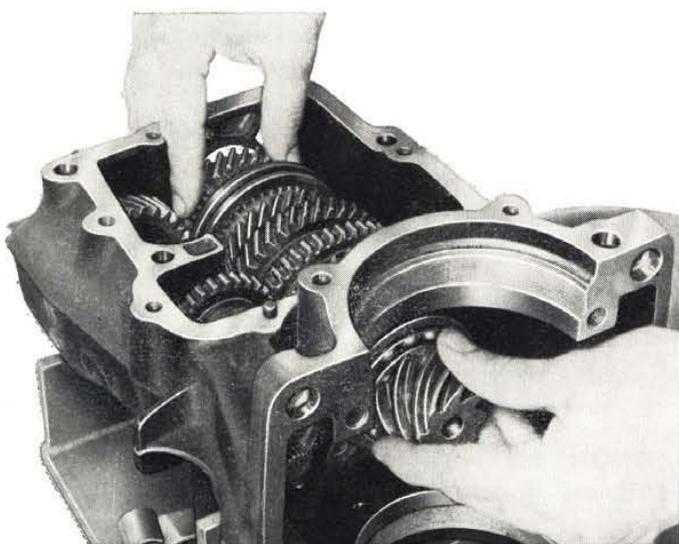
Installing the counter gear train and the countershaft-drive pinion.
